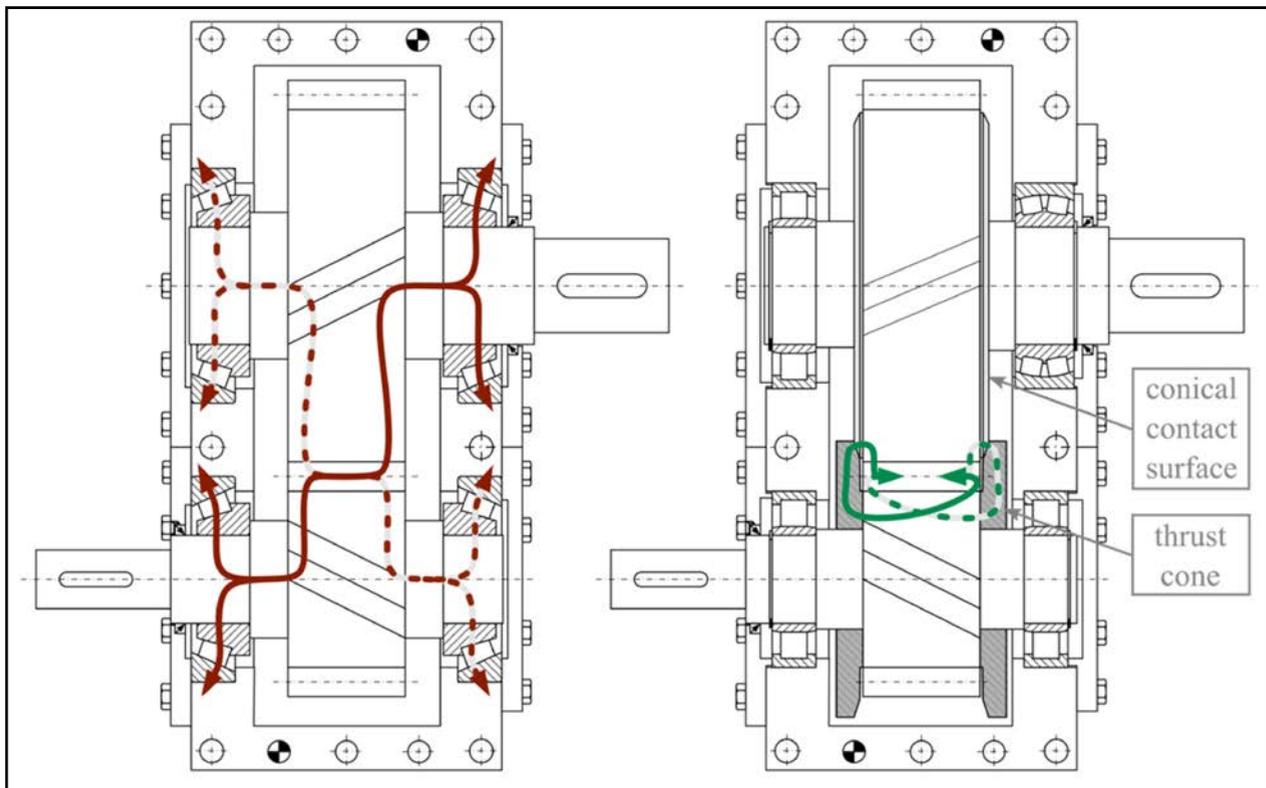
Axial force components in helical gear boxes: with conventional bearing concept (left) and thrust cone bearing setup (right) (Ref. 6).
